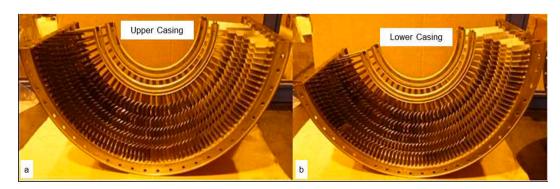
a. J85-CAN-15 Engine Compressor Upper Casing Assembly, 3.b. J85-CAN-15 Engine Compressor Lower Casing Assembly.
